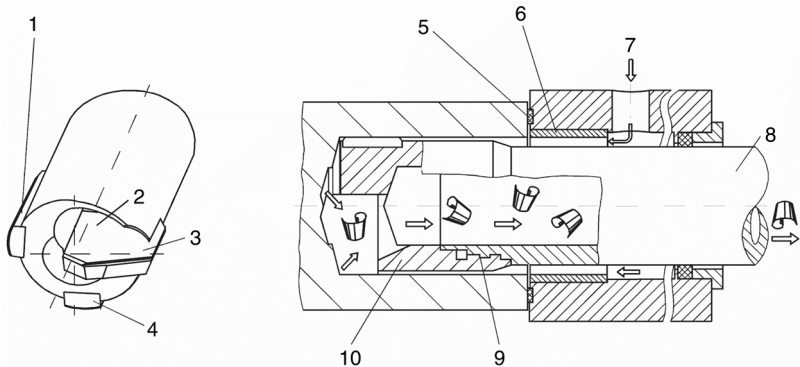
Tool and machine for BTA deep hole drilling: 1: Guide pad 2; 2: Chip mouth; 3: Cutting edge; 4: Guide pad 1; 5: Seal; 6: Drill bushing; 7: Coolant lubricant feed; 8: Boring bar; 9: Connecting thread; 10: Drill head [171]<sup>15</sup>
